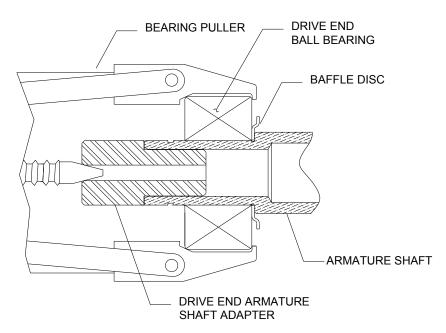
Removing Ball Bearing from Drive End Armature Shaft
